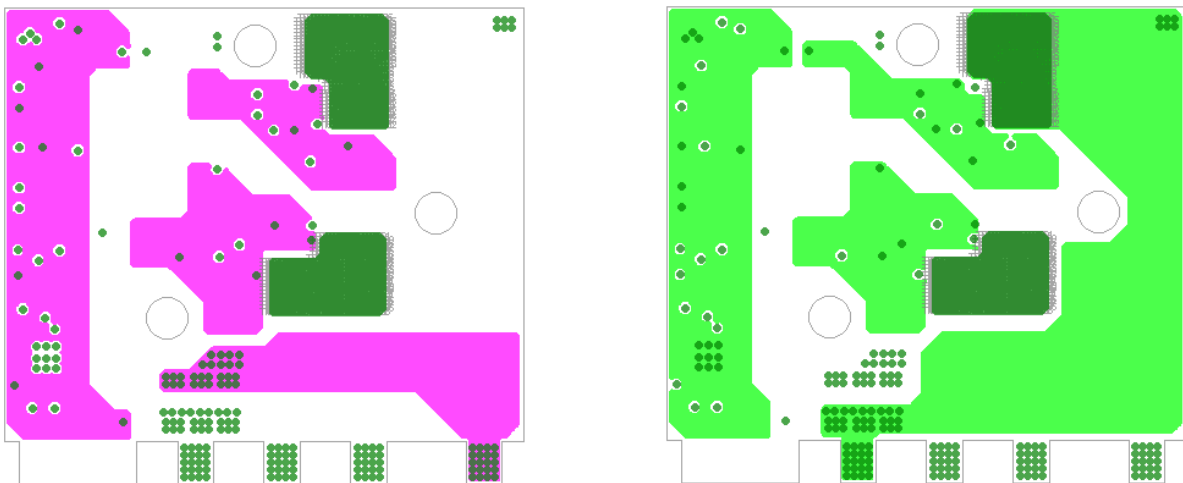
Inner Layers PCB Layout of FAST LEG CARD
